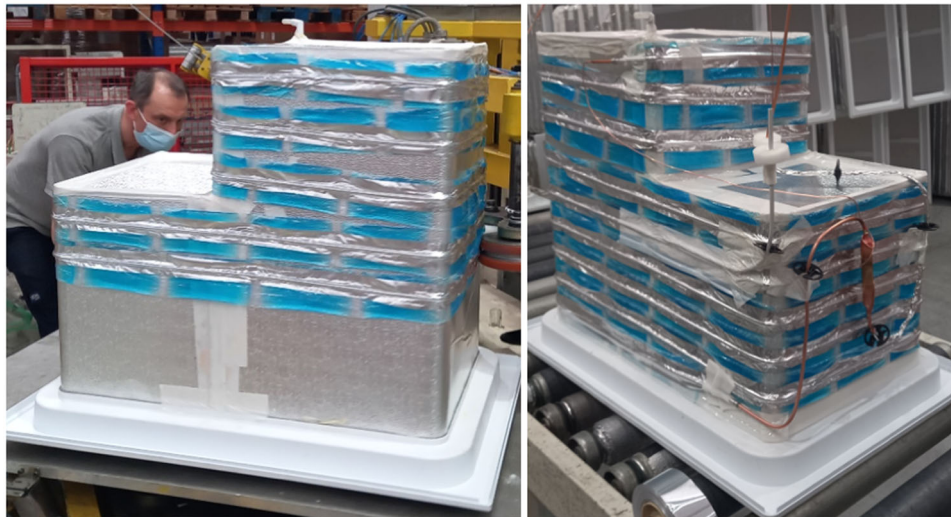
| Assembly of the CF_3 Prototype: Semiautomatic wrapping of the evaporator coil and PCM_B bags around the freezer compartment and final result before insulation foam injection.
